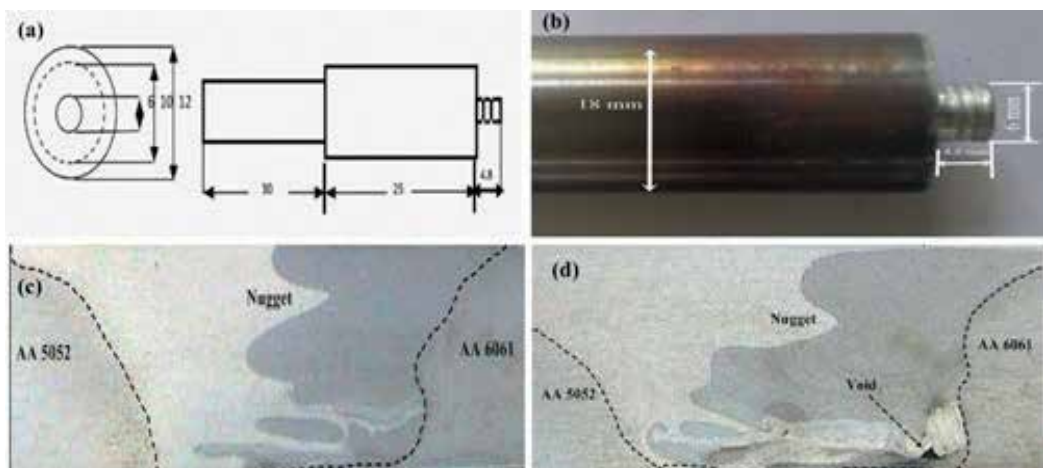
Dimensions of cylindrical threaded tool pin and cross sectional macrostructures of welded samples.
